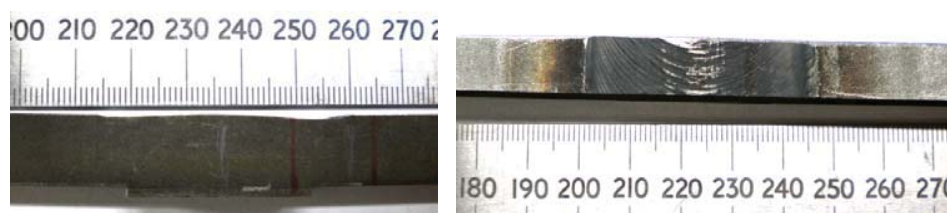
Photograph of the stir-friction weld characterised in the experiment. Left: view on the weld in the direction of neutron flux (longitudinal - direction of welding); Right – top view of the weld (normal direction to the surface of the plate).
